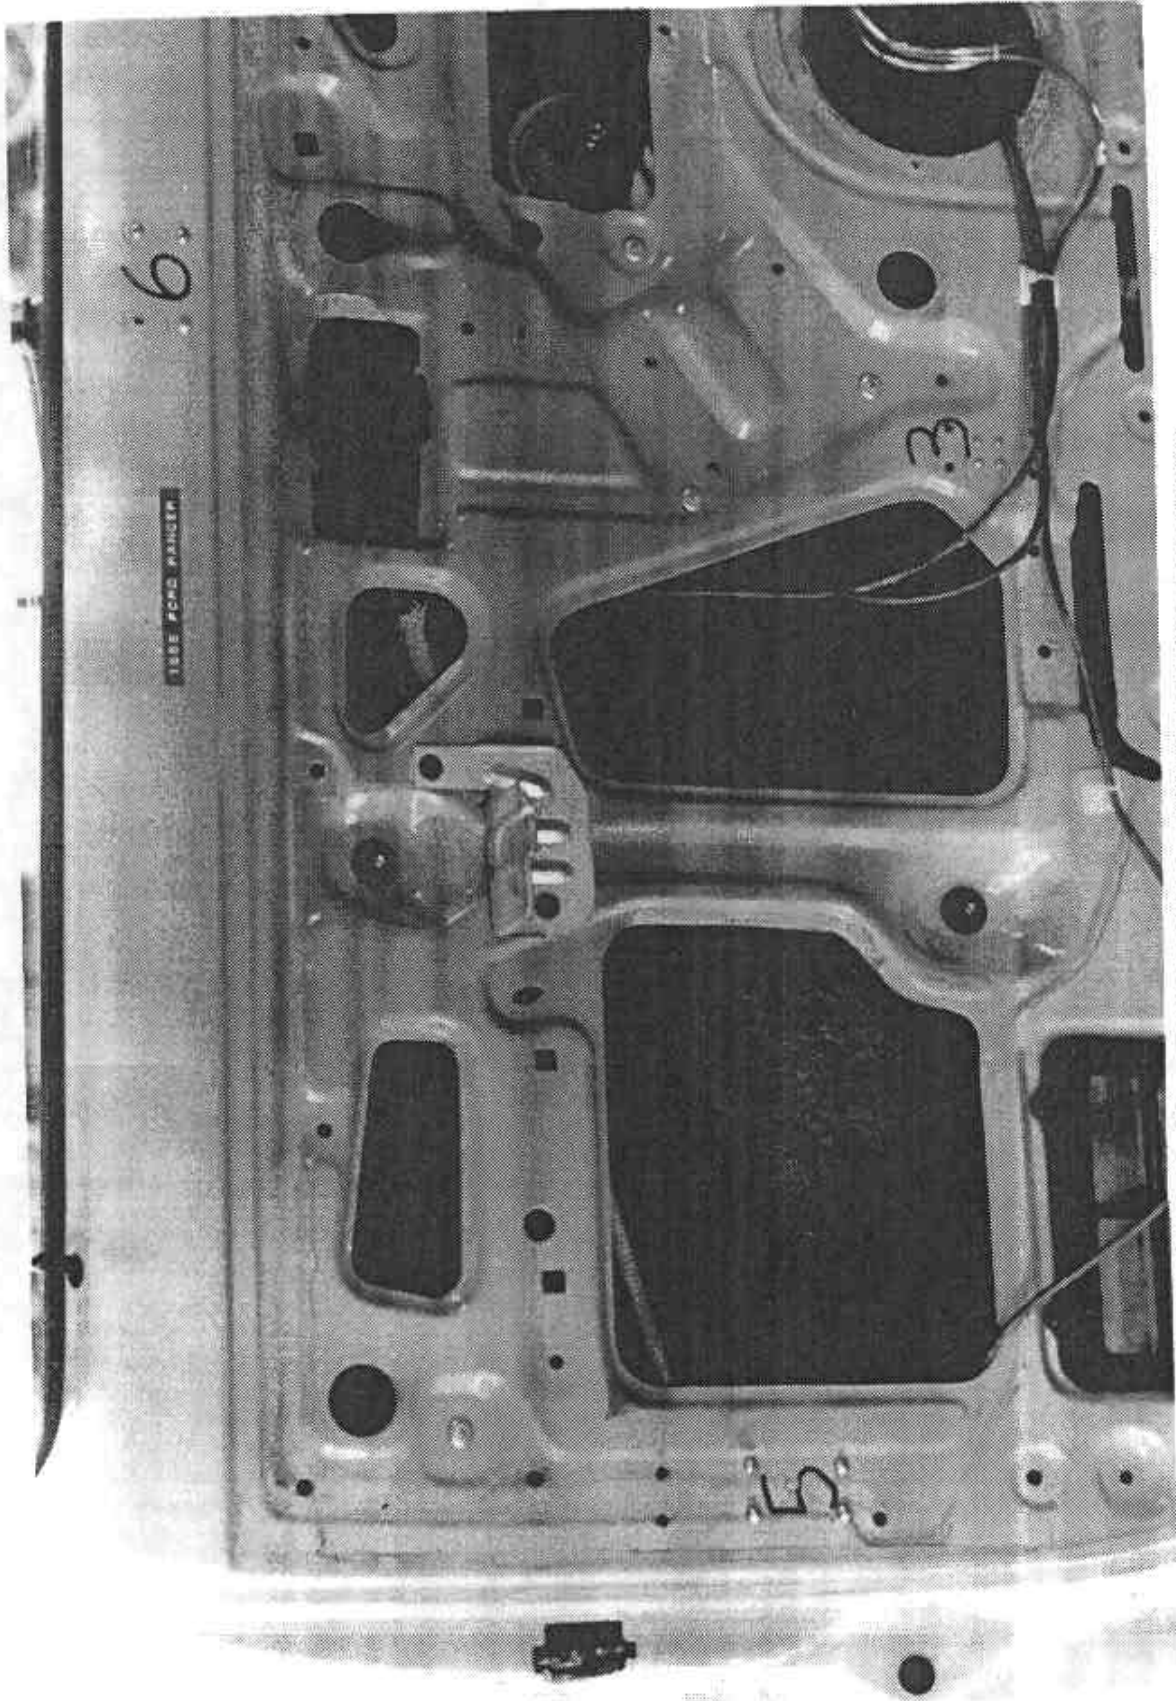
DRIVER DOOR ACCELEROMETER LOCATIONS
